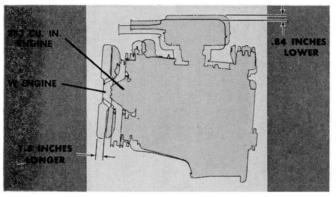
Overall size, "W" engine versus 283-cu-in. engine
